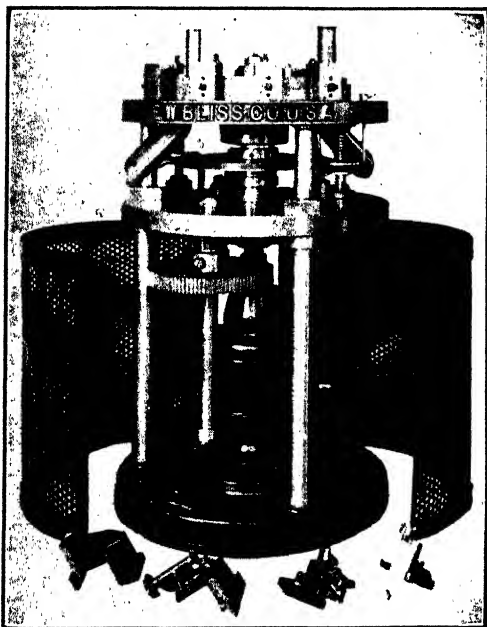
A Planchett upsetting machine for rolling thicker the circumference of the coin.
